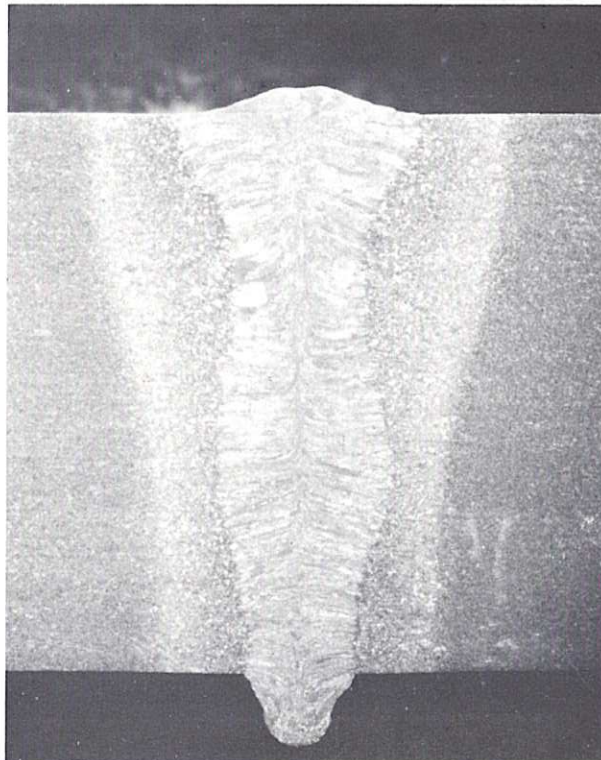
Laser weld in 2.5mm superalloy (3kW, 60mm s<sup>-1</sup>).
